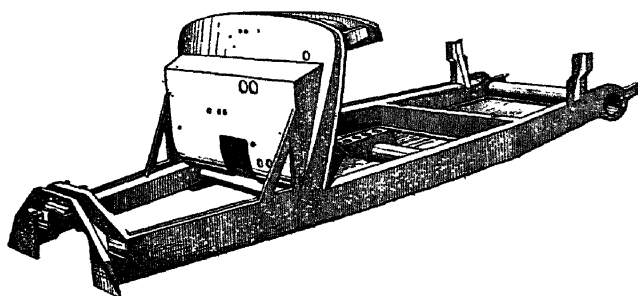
The Adler Junior Aluminium Alloy Chassis Frame, with Dash Combined.
